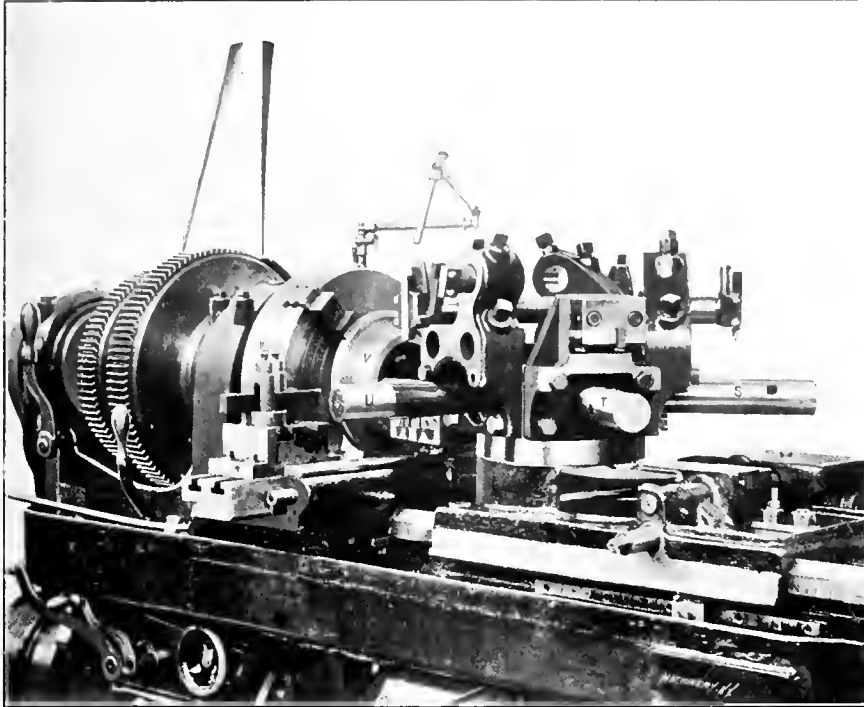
Front View of Machine engaged in Finishing a Flanged Sleeve, made from a Steel Casting.
